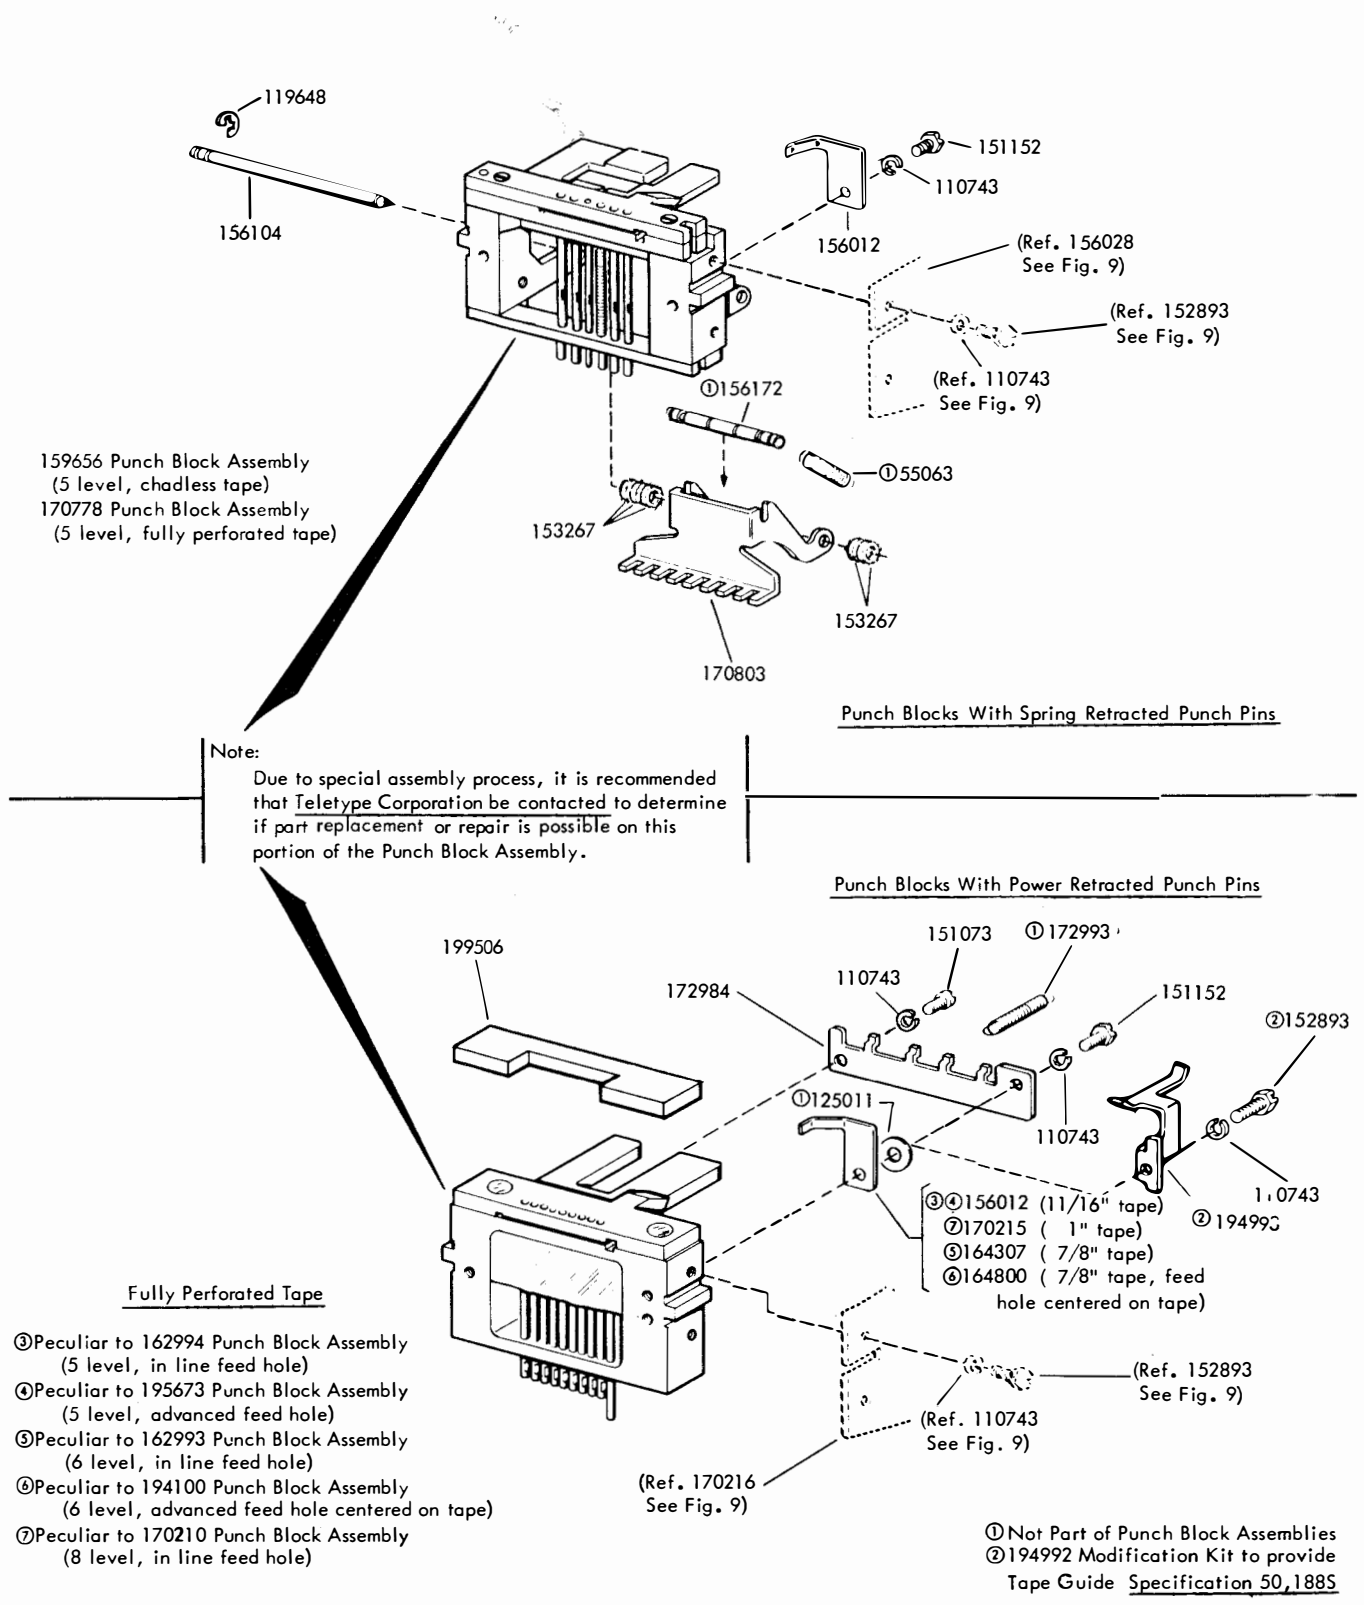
PUNCH BLOCK ASSEMBLIES
